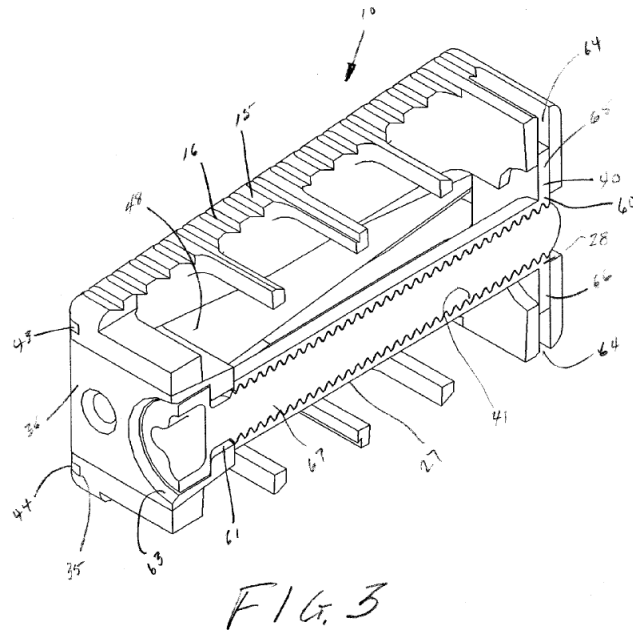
is a cross-section view of spinal fusion device 10 including jack screw 67, which is inserted through bore 61 of distractor 42. *Id.* ¶ 29. Jack screw 67 engages internal threads in tube 27 of link 40. *Id.* ¶ 25. Tightening jack screw 67 draws distractor 42 between the upper and lower sections 11 and 13, increasing the distance between sections. *Id.
